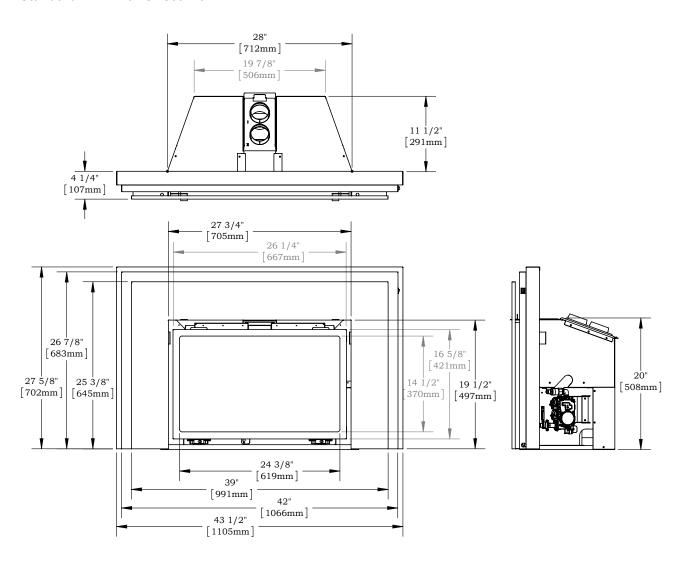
Sec.1 30DFID-S offset trim dimensions (Tolerance $\pm \frac{1}{6}$ ") [1.25 mm]
